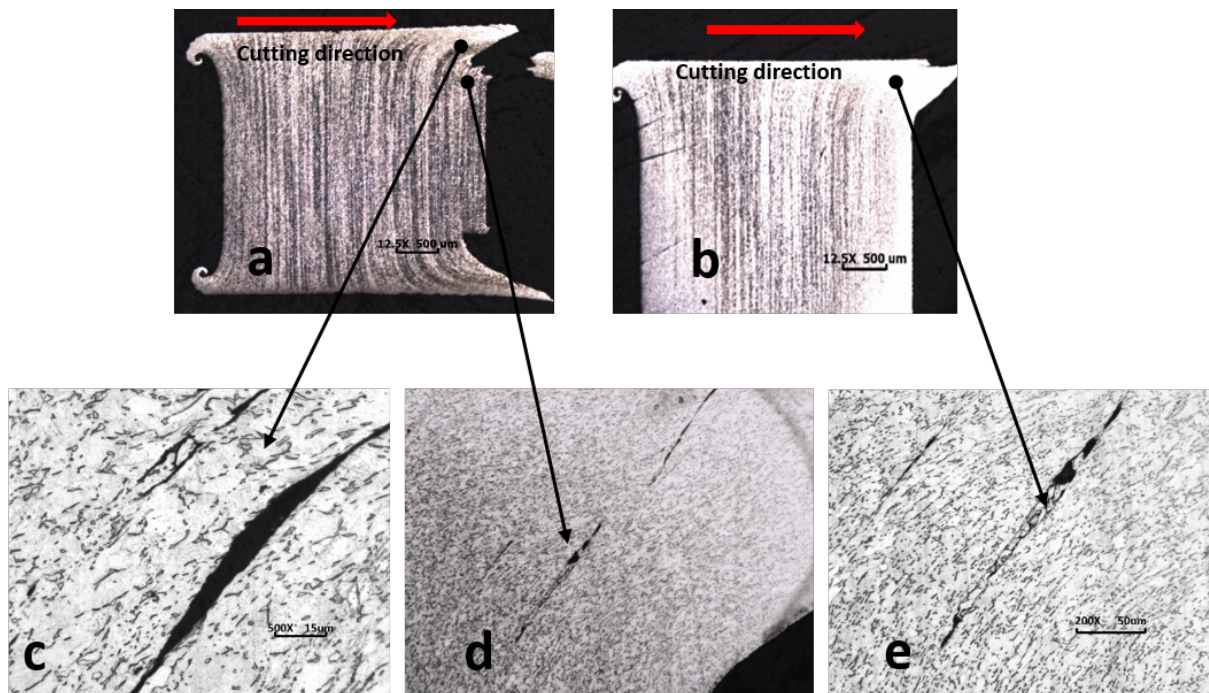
Fracture and tearing of the surface observed at the hole exit for VDC produced by tool wear level 0.8 mm (a) and 1.0 mm (b)
